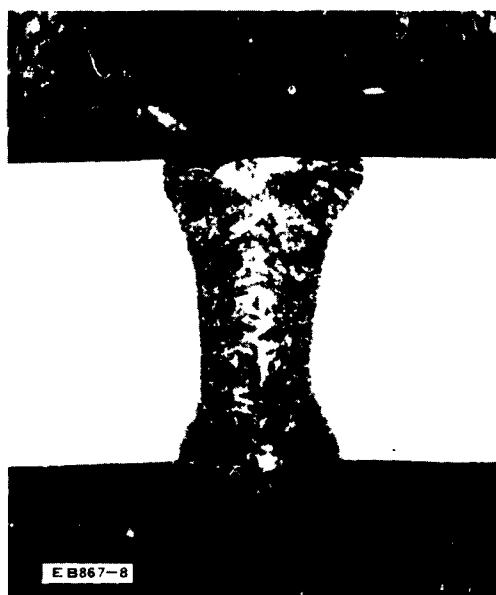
Trial Weld Cross-section; X20; 0.090-Inch D6AC; 150 KV, 15 ma, 58 ipm, 0.015-Inch Diameter Beam
